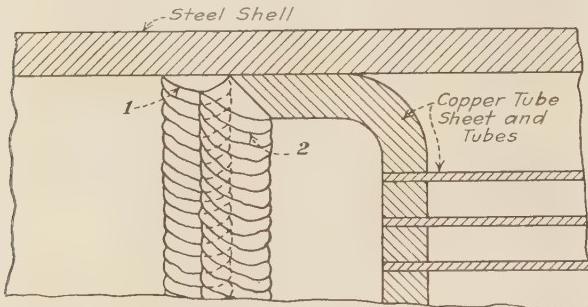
CONNECTION BETWEEN DEOXIDIZED-COPPER TUBE SHEET AND STEEL SHELL
